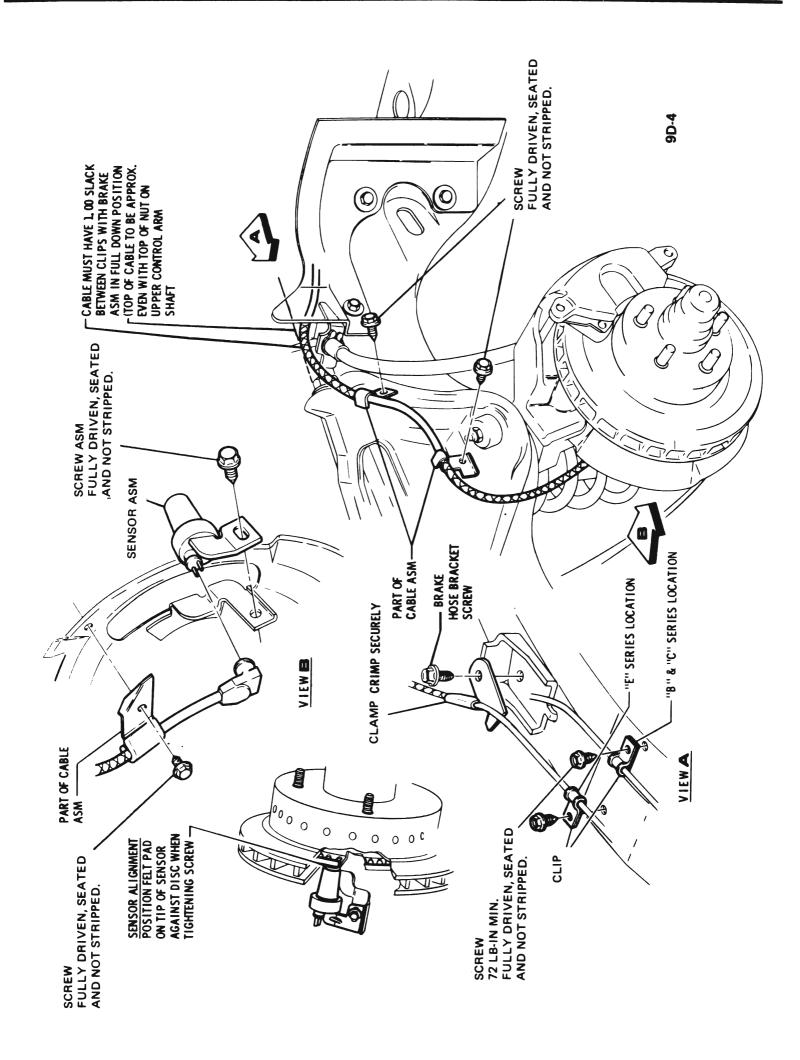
D-4 Upper Control Arm and Front Wheel Sensor
